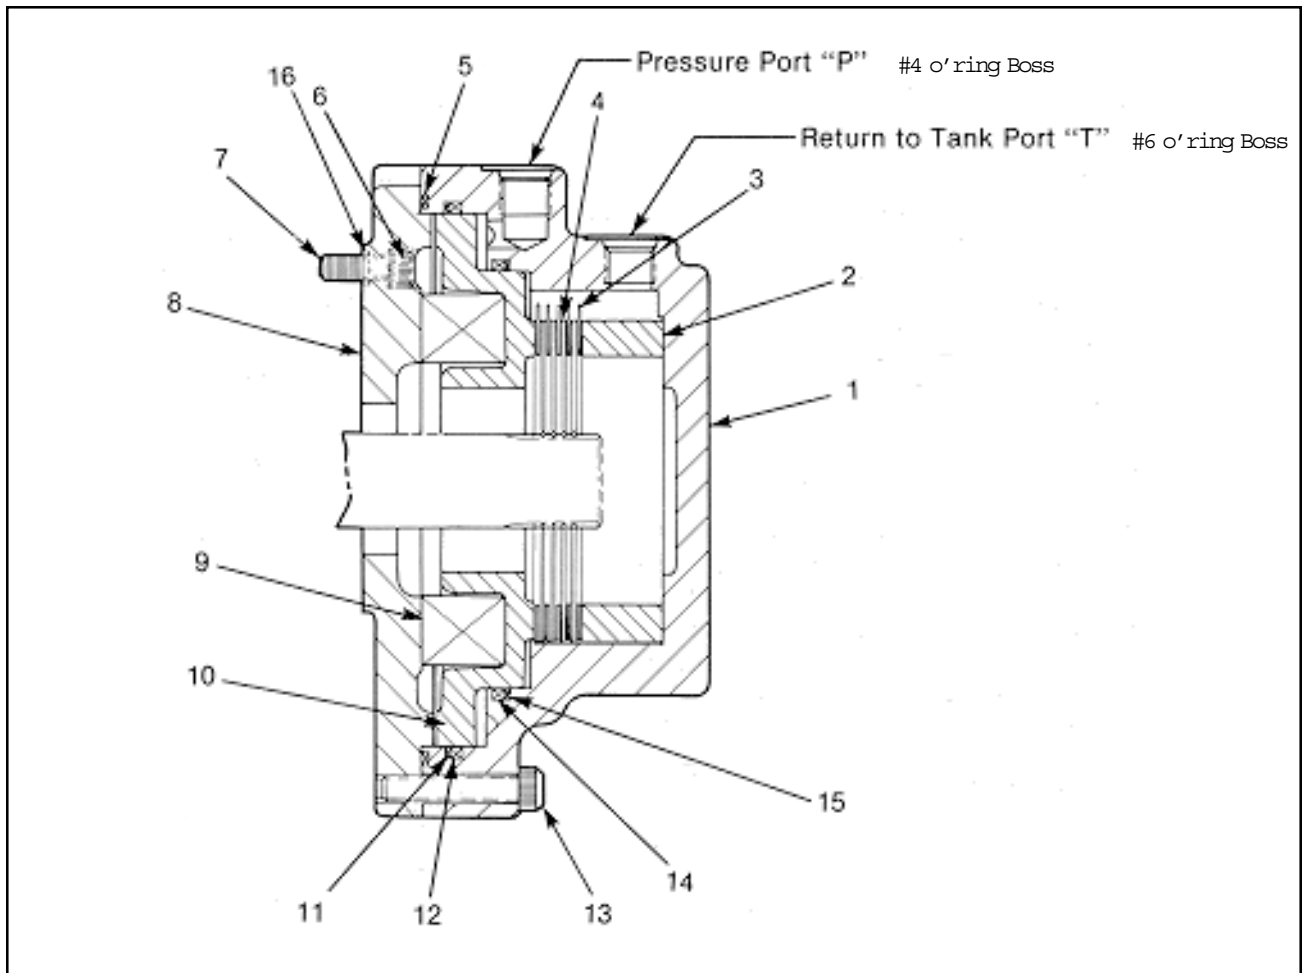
SECTIONAL VIEW, ROL-SEAL® BRAKE
